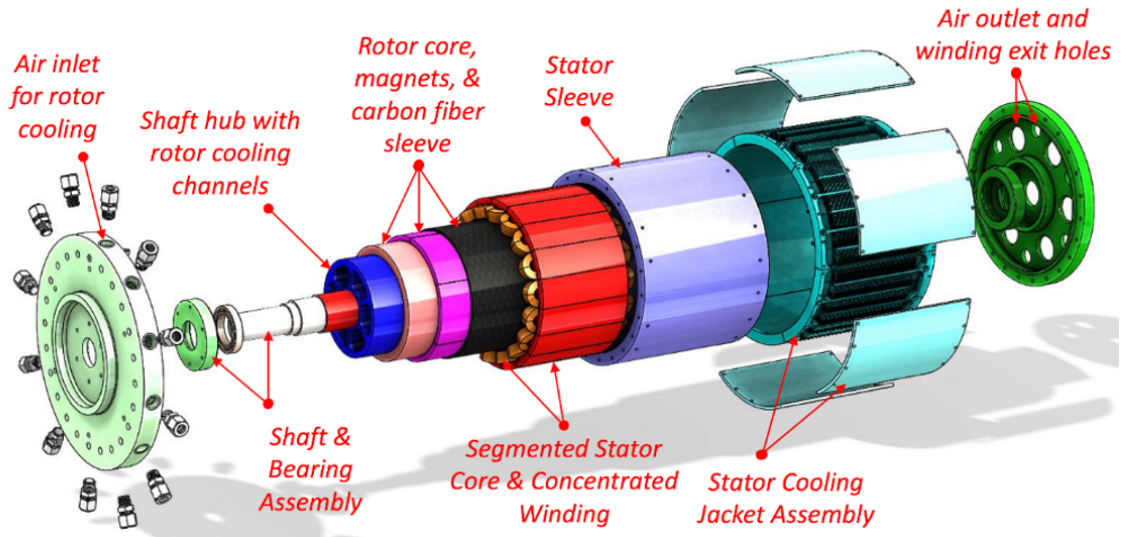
Exploded view of a 200 kW machine of the same topology and materials intended for the 2.1 MW design (Figure courtesy of UW-EMPEC)
